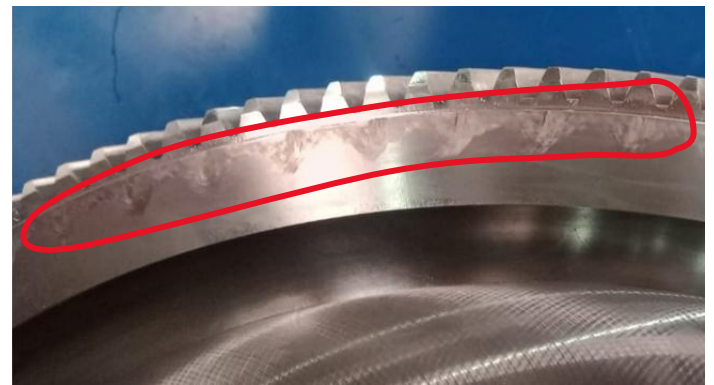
92 IMPRINTS ON MAC A BULL GEAR.
